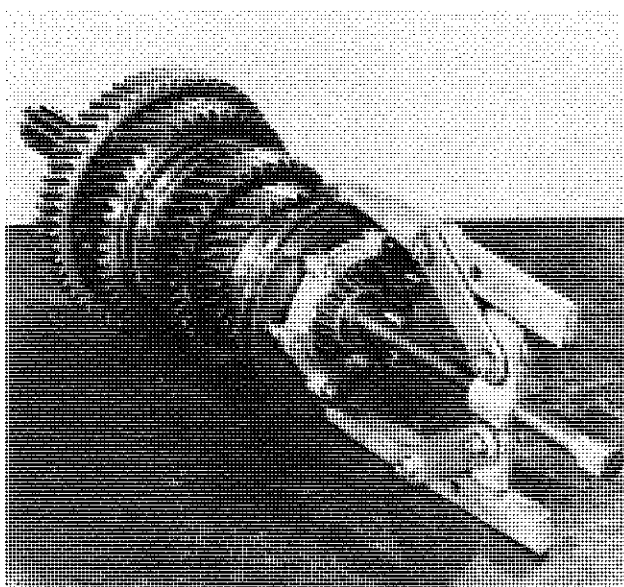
Removing 4th-5th Speed Synchronizer and Front Bearing
